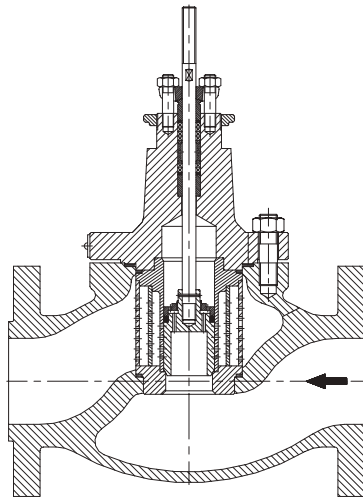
balanced Plug with Gasket, Control Cage and 2-stage Pressure Reduction
